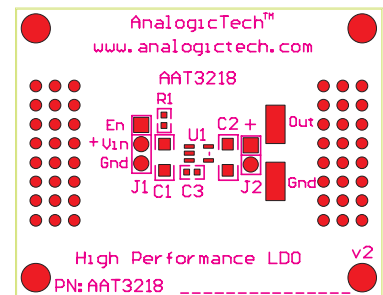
Evaluation Board Top Side Silk Screen Layout / Assembly Drawing.
